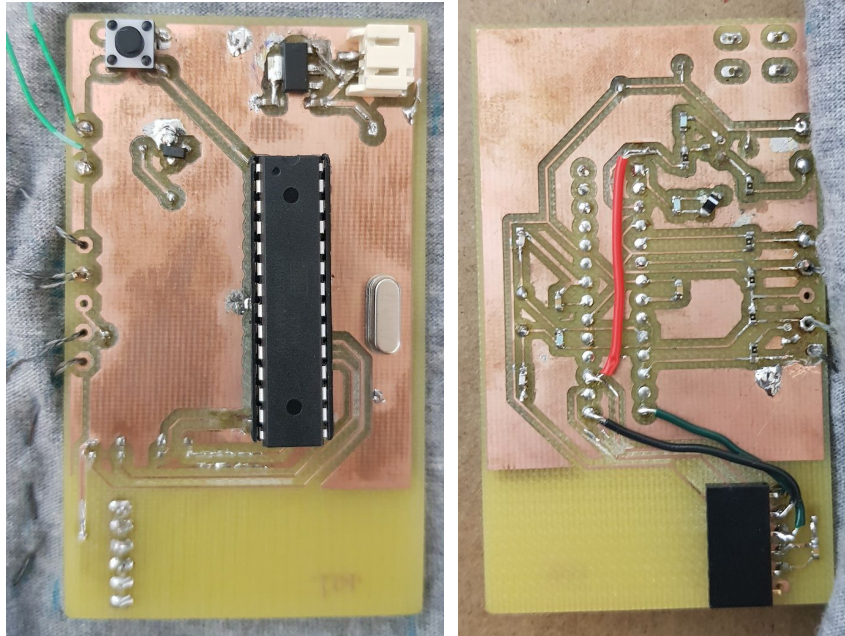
Sleeve PCB (from left to right: top view, bottom view)
